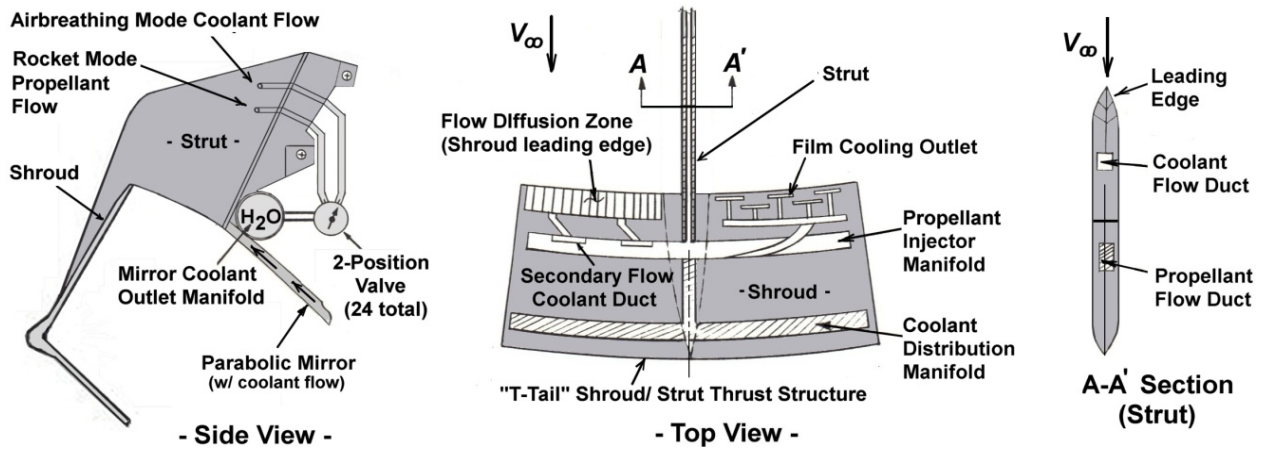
Side and top views of shroud and support struts, explaining coolant scheme (Ref. 16).
